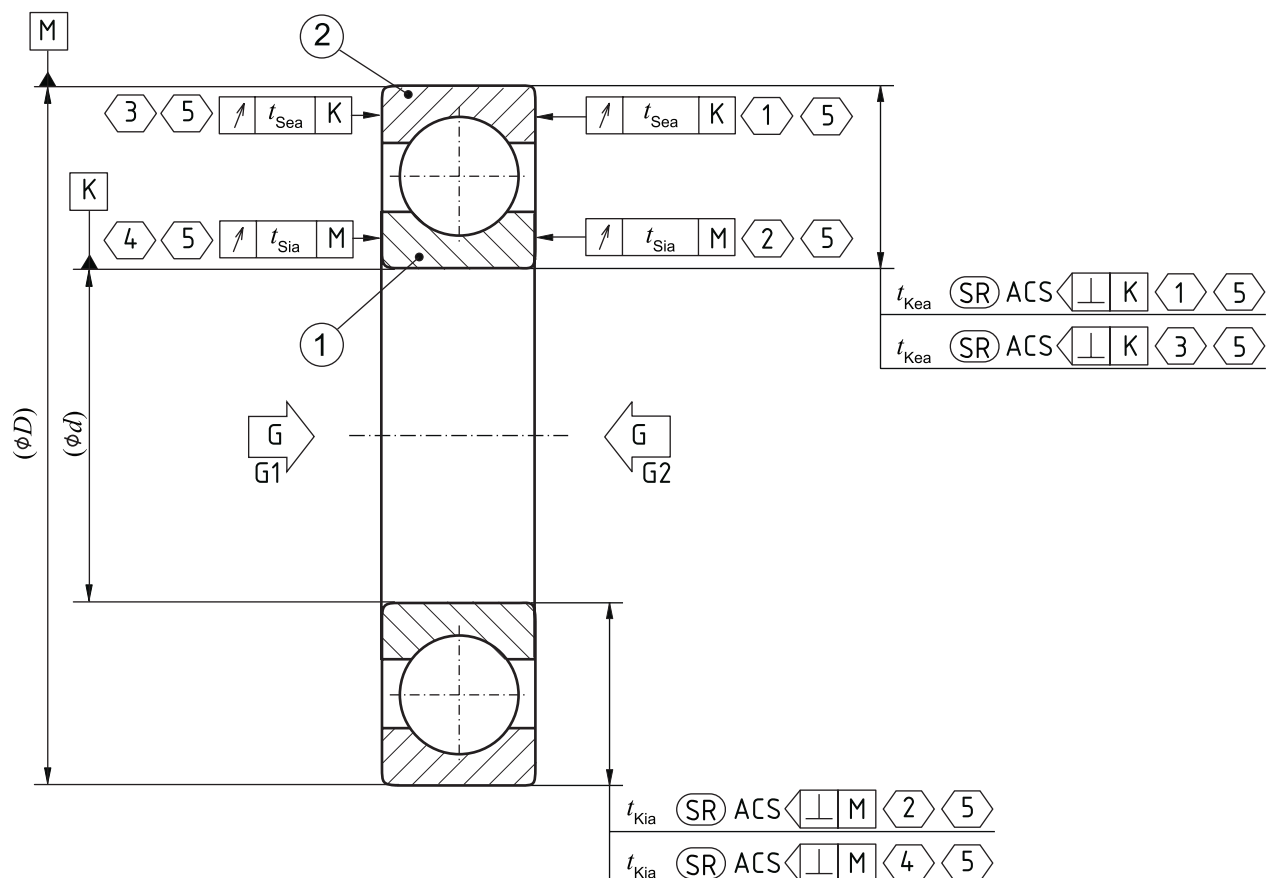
Geometrical tolerances for single components of bearing with cylindrical bore
